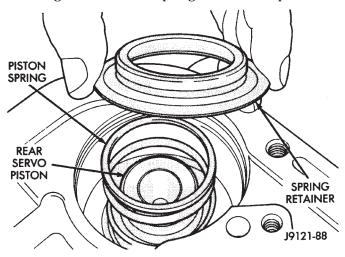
Installing Rear Servo Piston Spring And Retainer—46RH
